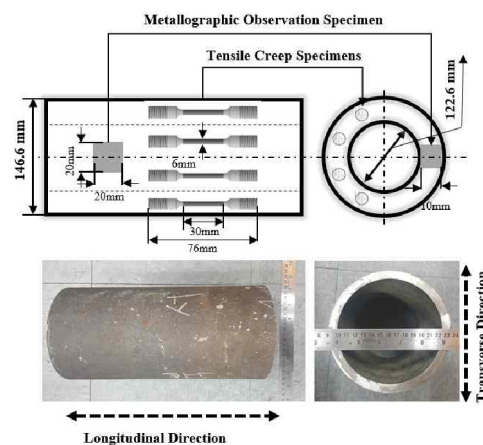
Schematic illustration of the specimens sampling location for a rectangular block and tensile creep testing specimens from each of the modified HP reformer tube.
